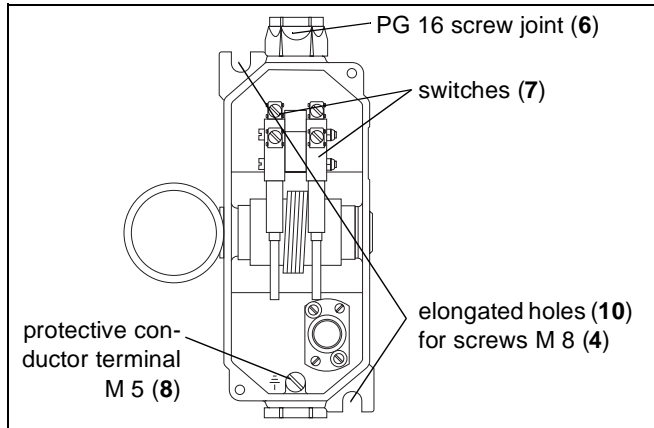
Dismounting belt misalignment switches from the belt conveyor
